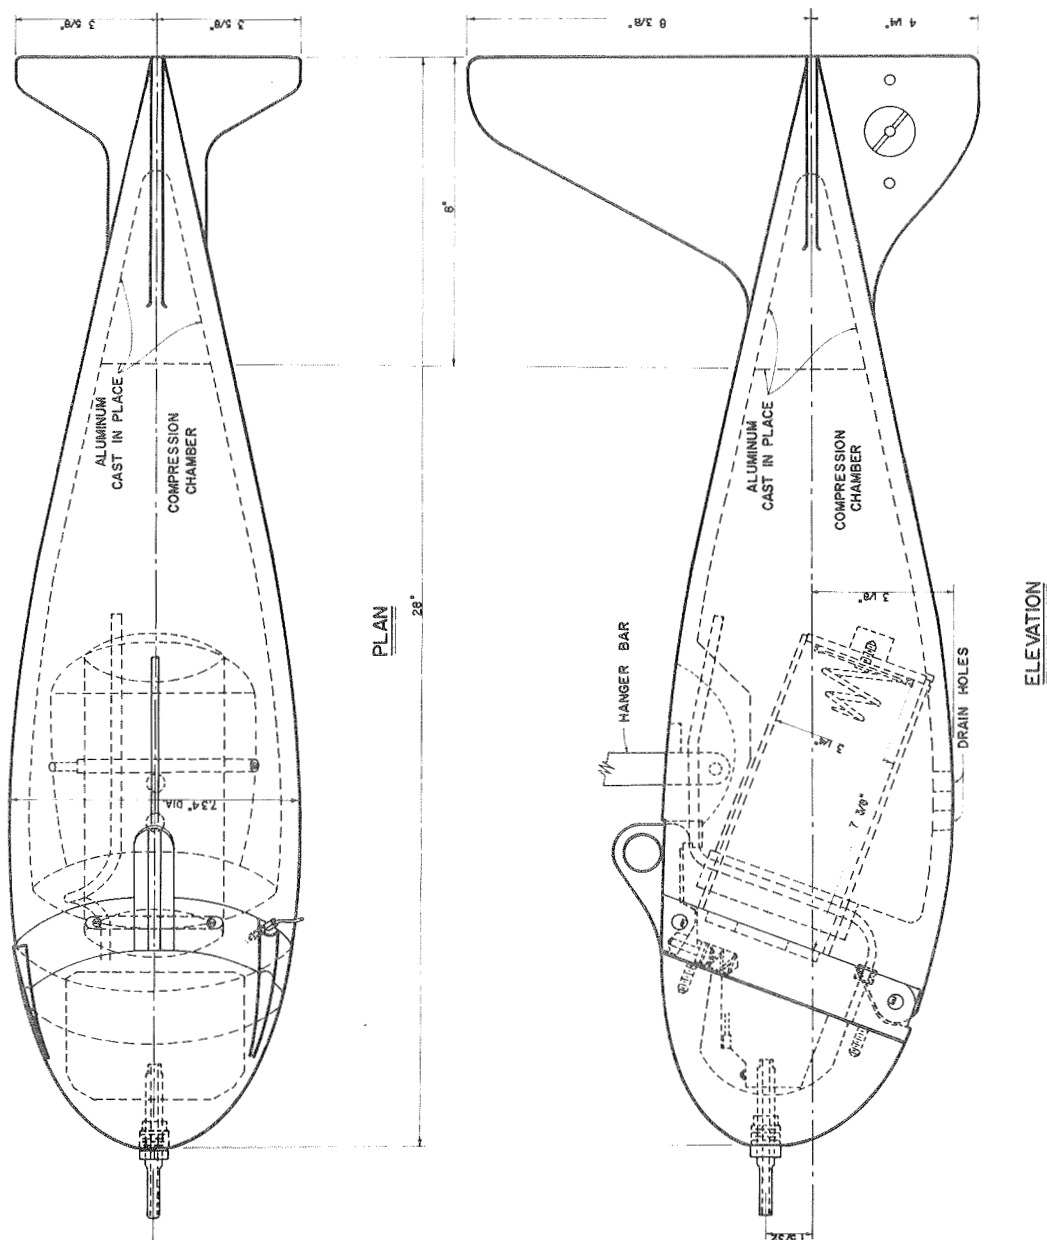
POINT-INTEGRATING SAMPLER, US P-61
